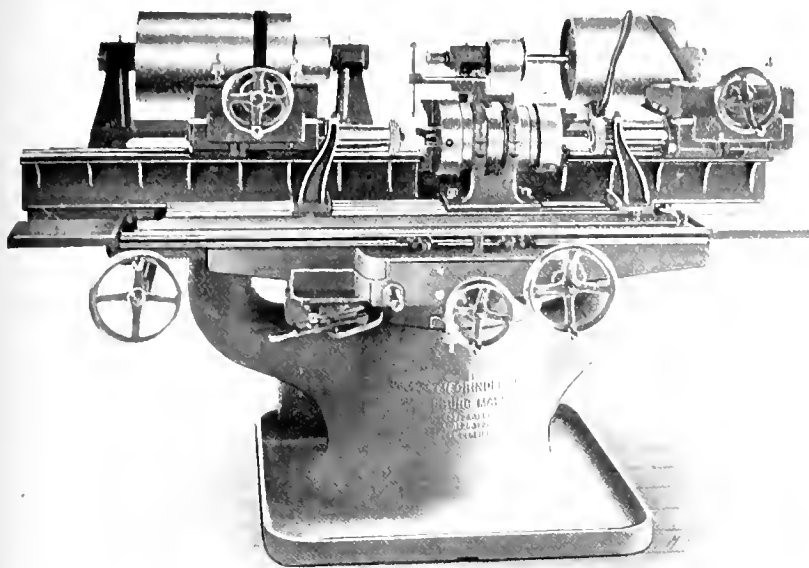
Bath Duplex Internal Grinding Machine, having Two Wheel-spindle Heads
